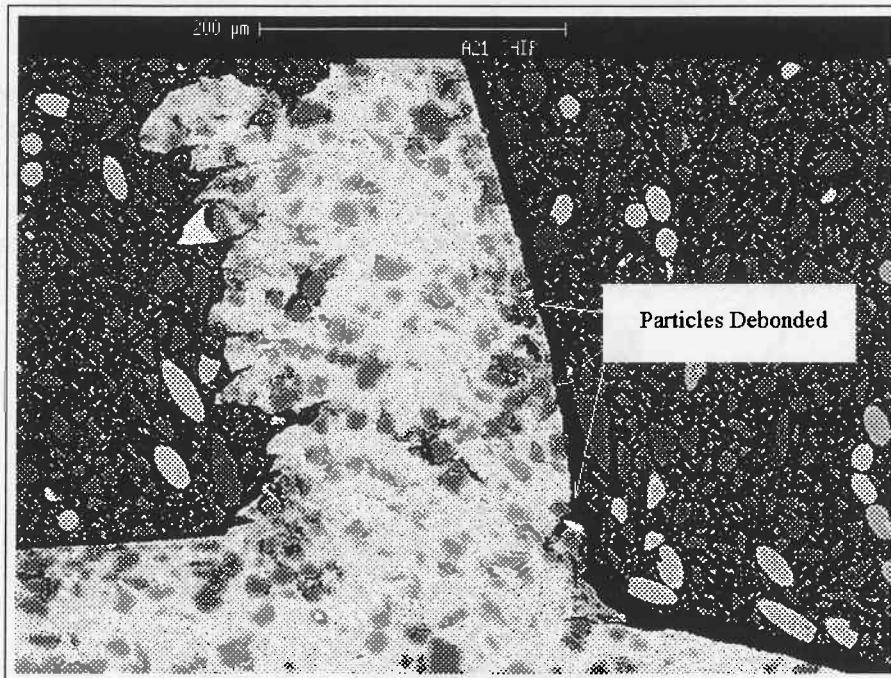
Chip Root Sample Obtained During Machining Of PRMMC With Tungsten Carbide Insert
